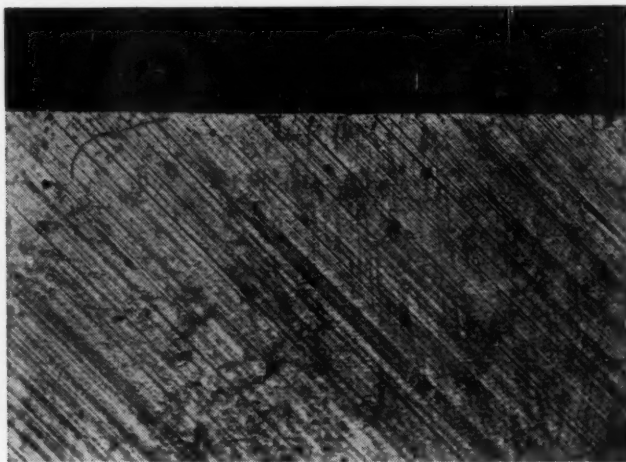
CUTTING EDGE OF SPLINING CUTTER GIVEN HIGH SURFACE FINISH AND KEEN EDGE
